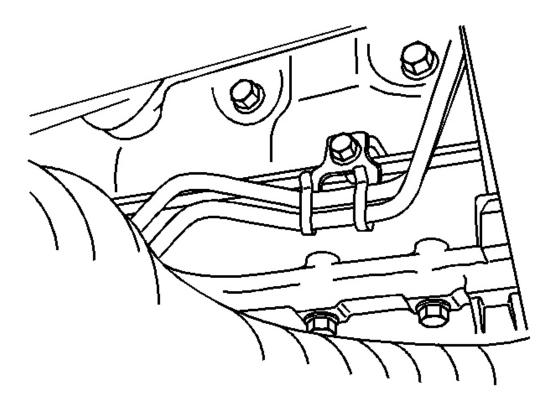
View Of Transmission Cooler Lines & Clips Courtesy of GENERAL MOTORS CORP.
